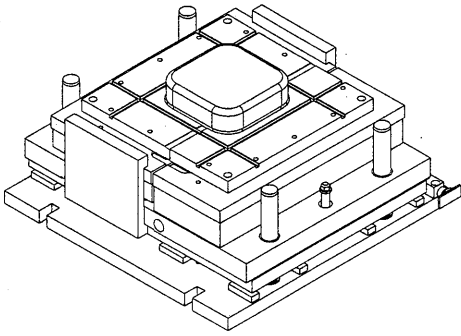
Punch (middle) and the divided blank holder (draw bead side)
